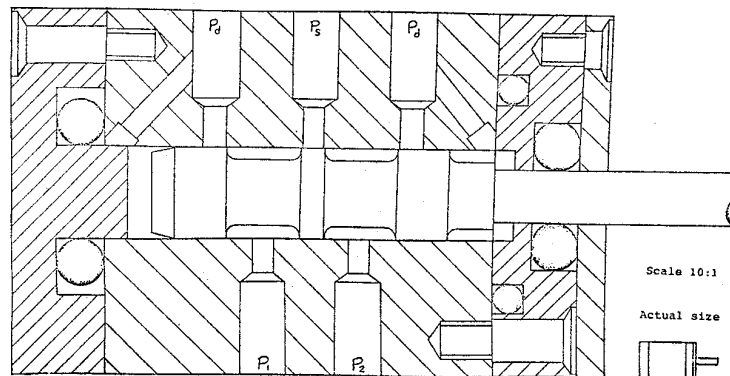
Schematic diagram of miniature hydraulic spool valve
